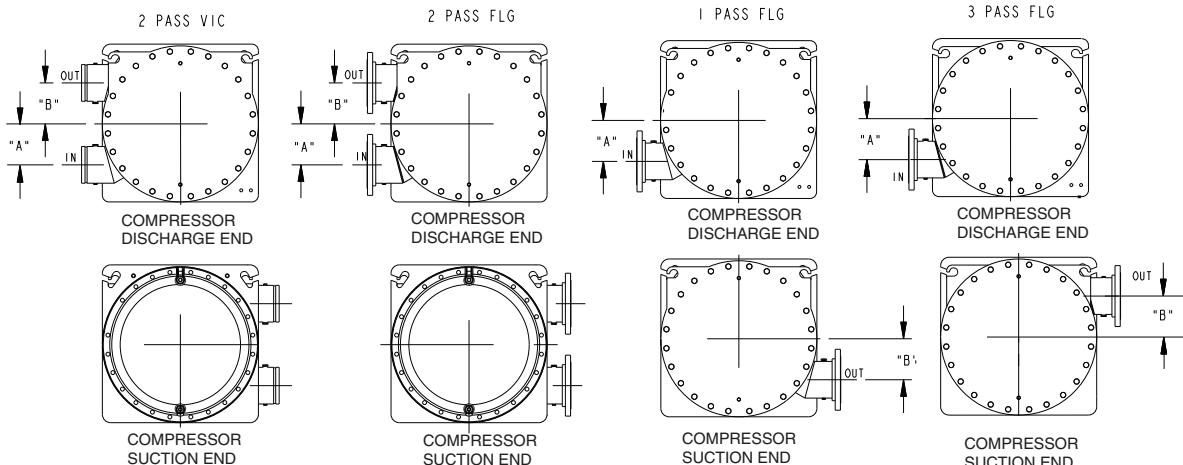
30XW225-300 Unit Dimensions (cont)
